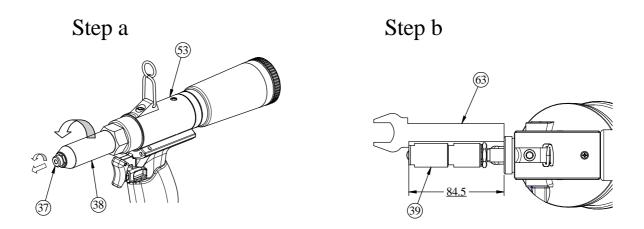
Detail illustration of change the nosepiece, jaw, and jaw pusher.
